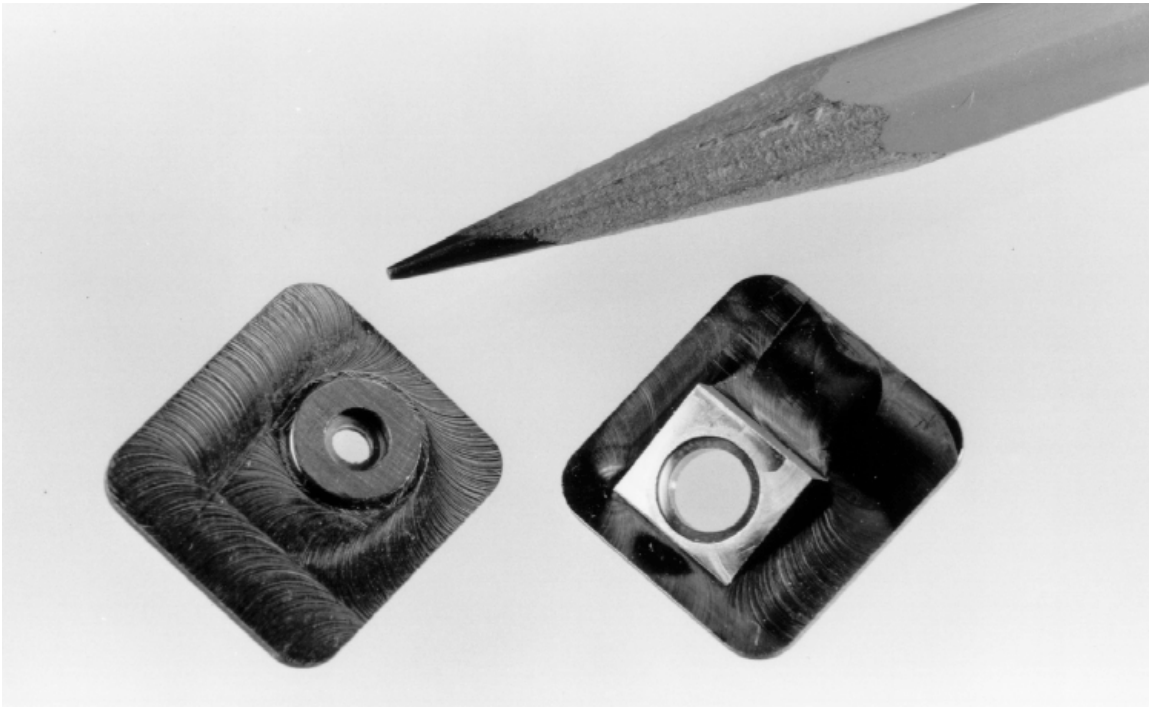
Two examples of active metal brazed lid/window assembly designs.
